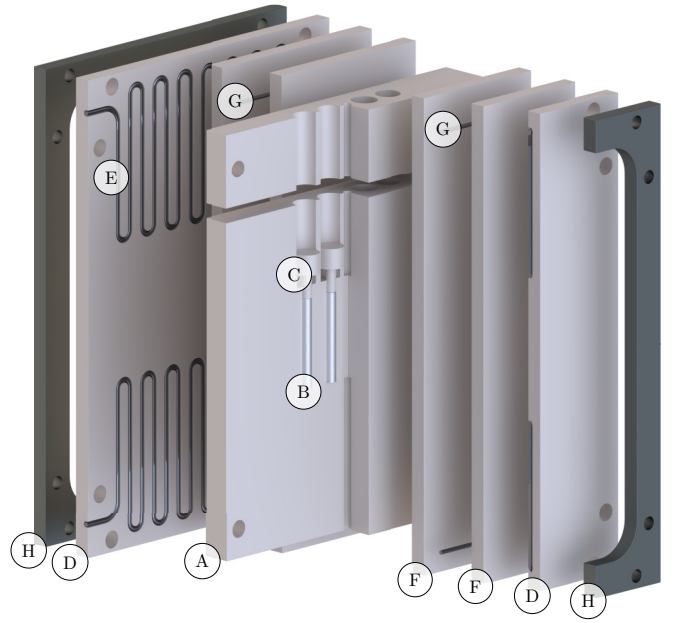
Exploded view of the sample cell, showing (A) the crucible with (B) samples and (C) pistons, as well as (D) the heat plates, where (E) the heating wire is placed. Between the heating wire and crucible are (F) two extra BN plates with (G) molybdenum wire as separator. The sample cell is held together by (H) the niobium frame. The plates, wires, and frame in front of the crucible, as well as the crucible parts themselves, are cut in the figure to reveal the pistons and samples. The BN plates between the crucible and the heating wires are also cut in the figure to reveal the meandering course of the heating wire.
